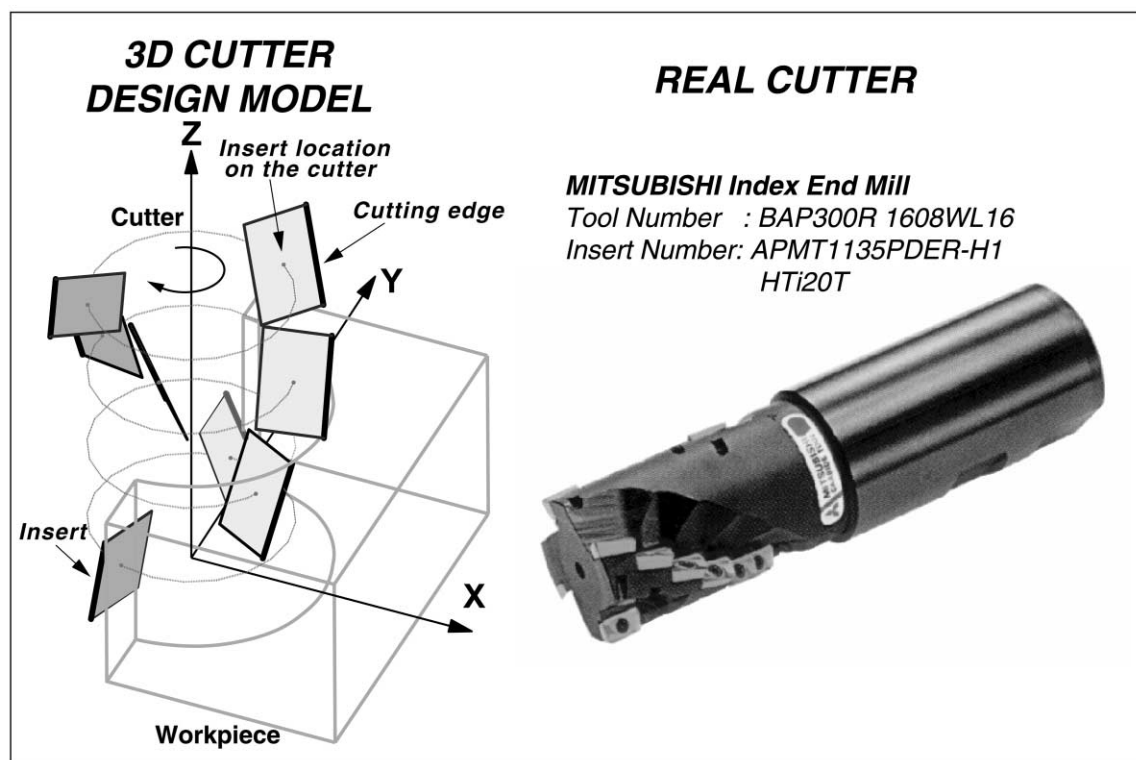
Mitsubishi inserted cutter Cutter I (cutter number: BAP300R 1608WL16; insert number: APMT1135PDER-H1, "insert dimensions $a=6.35$ mm, $b=9.8$ mm", HTi20T). See Eq. (9) for insert location parameters. Shank diameter=25.4 mm, cutter diameter=25.4 mm, two flutes, four inserts on every flute.
